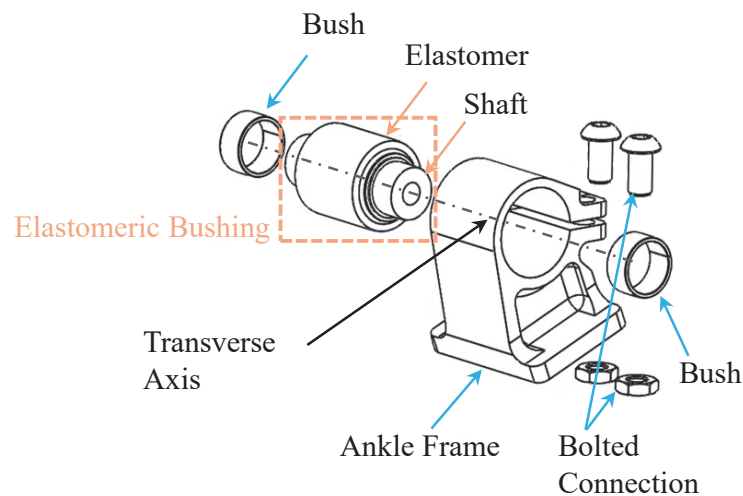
Expanded view of the MyFlex- η multi-axial ankle sub-assembly.
